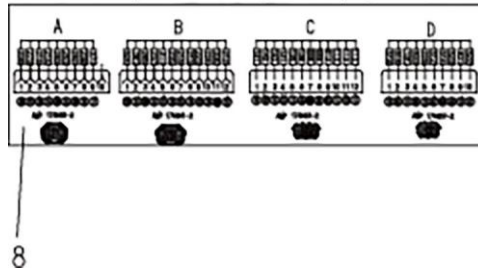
LG20BJVI-LG25BJVI Control Device Assembly
